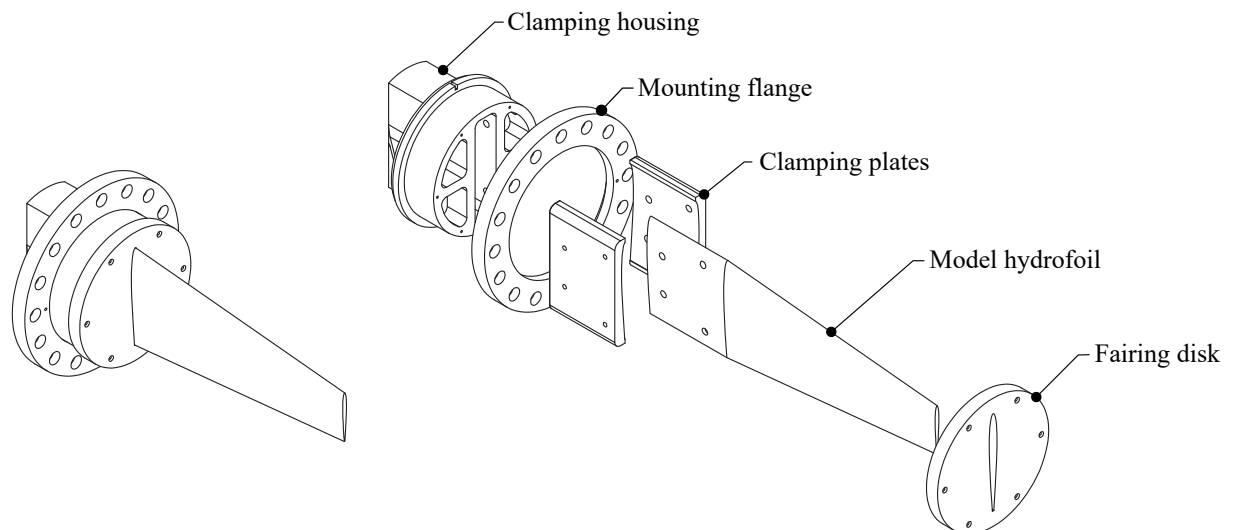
Hydrofoil model assembly showing an exploded view of the clamping housing arrangement that allows continuity of the model.
